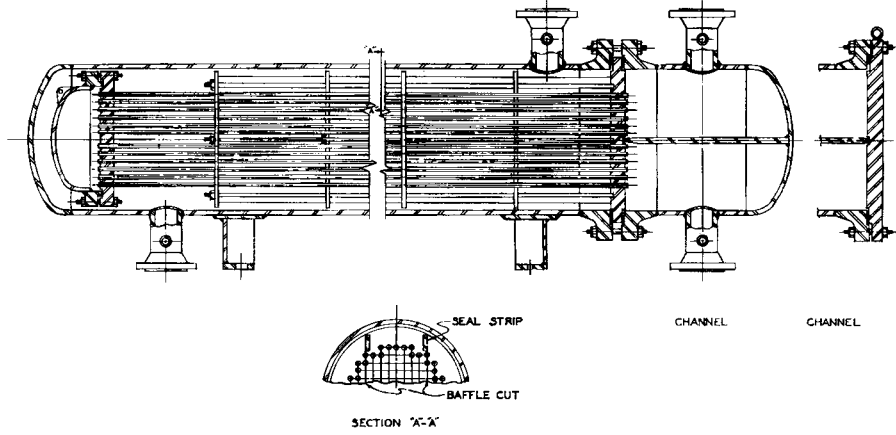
I. Floating head, removable type. (Used by permission: Yuba Heat Transfer Division of Connell Limited Partnership.)
